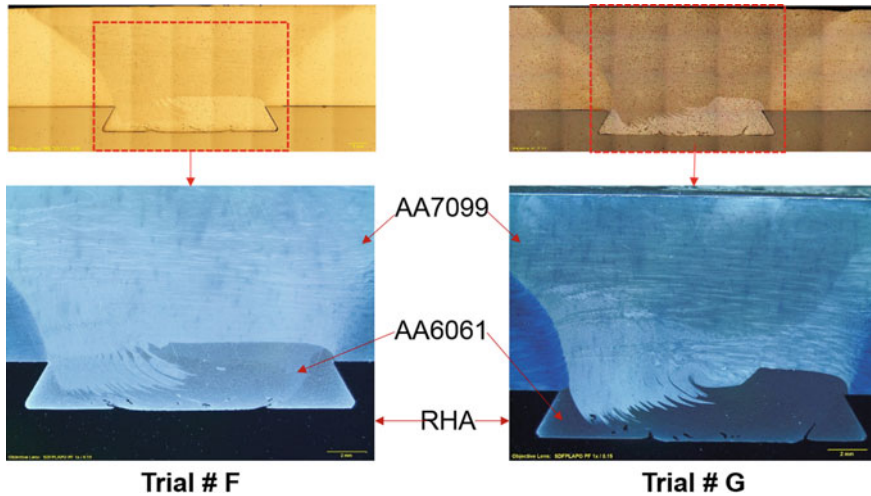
Weld macro cross sections of AA7099 to RHA joints via AA6061 interlayer
